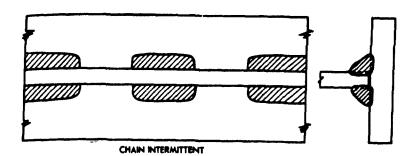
Fillet welded tee joint on heavy plate.
